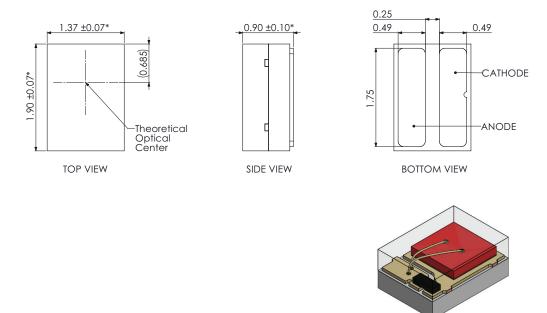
Mechanical dimensions for LUXEON IR Compact for Automotive Line.
